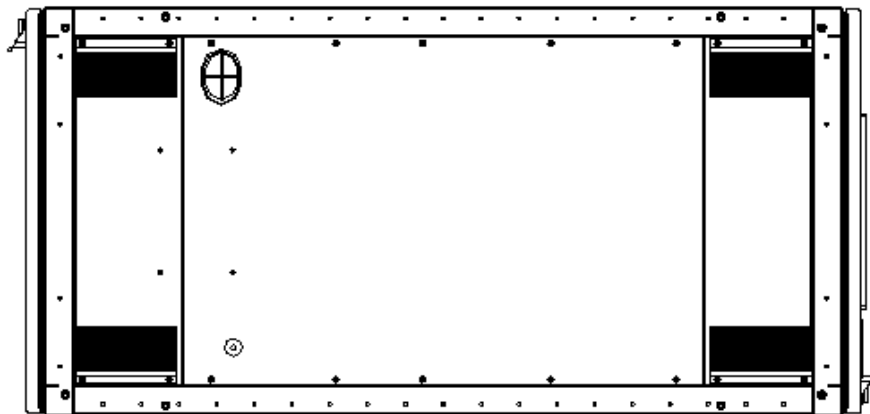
Foundation diagram of 1200mm, in mm)
